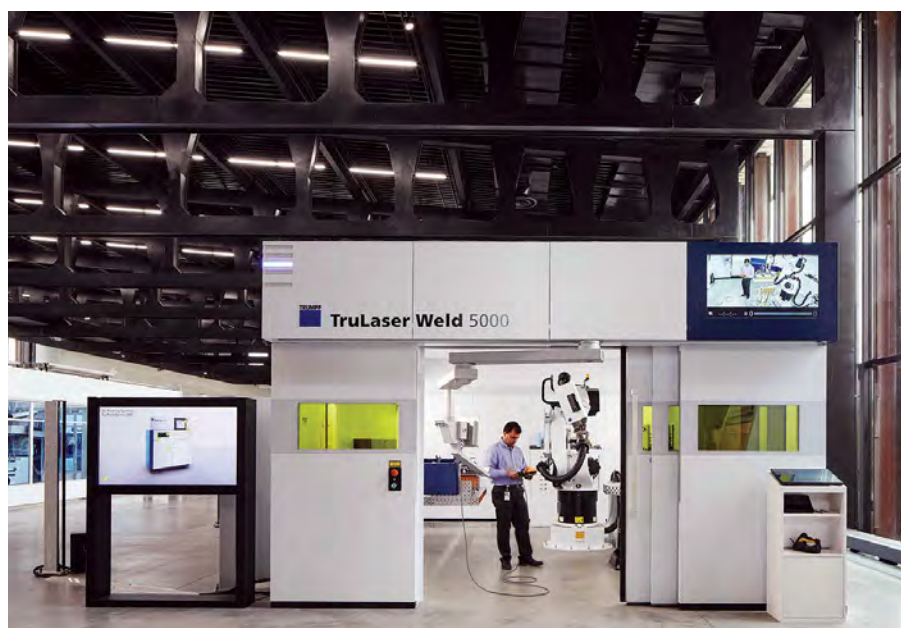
The TruLaser Weld 5000 system.
